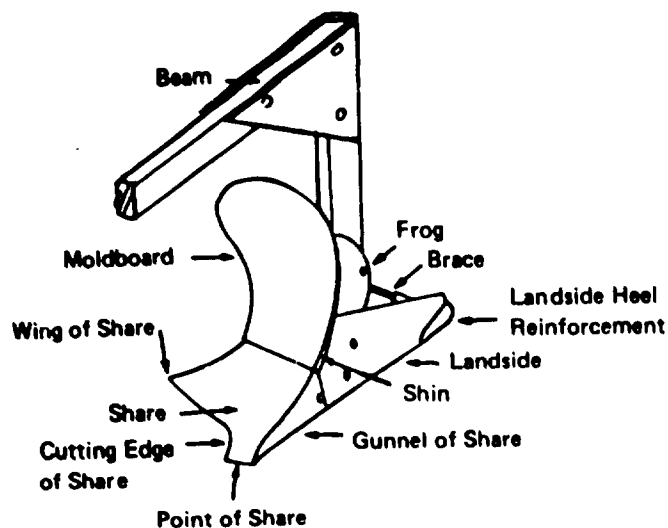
PARTS OF MOULDBOARD PLOUGH BOTTOM
